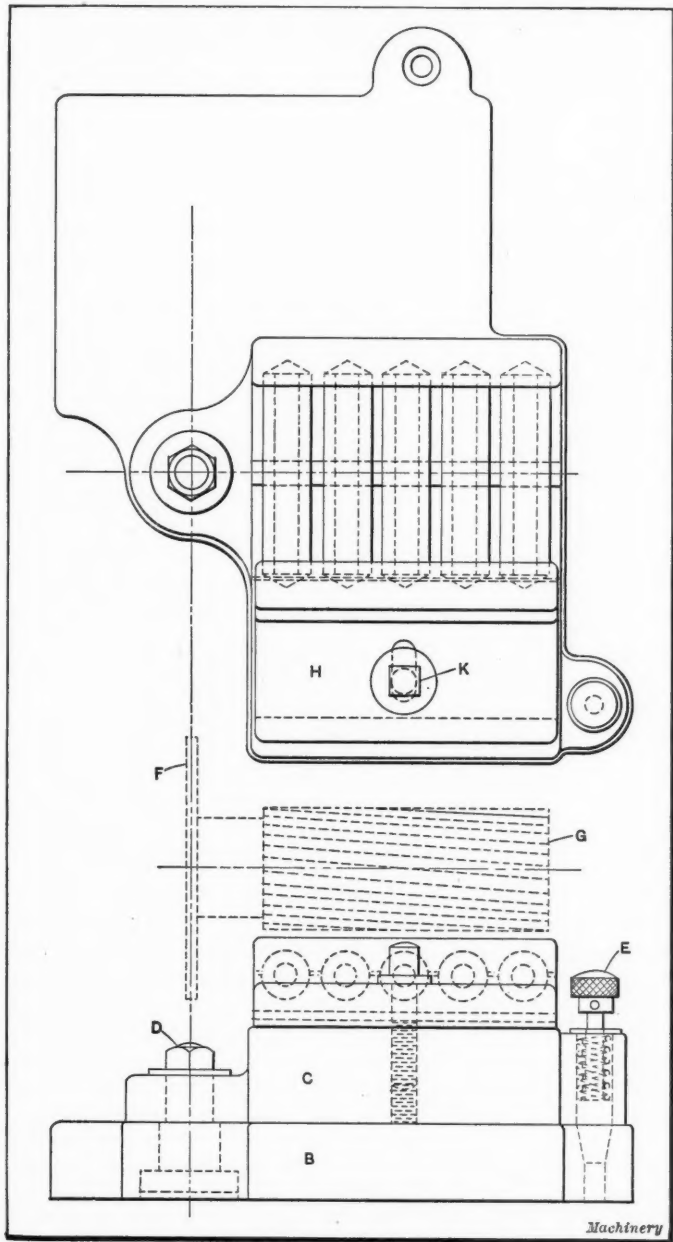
Fixture set in Position for milling the Arc *A* in Ten Bushings
